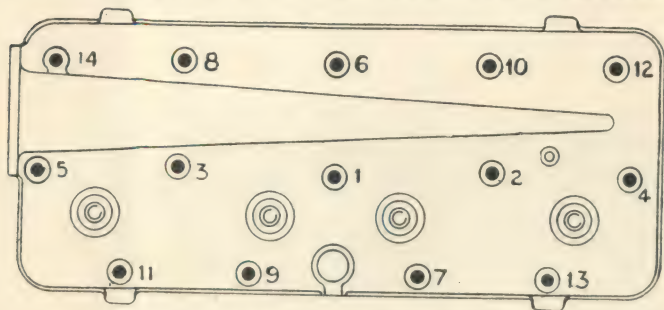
ORDER OF TIGHTENING CYLINDER HEAD NUTS
